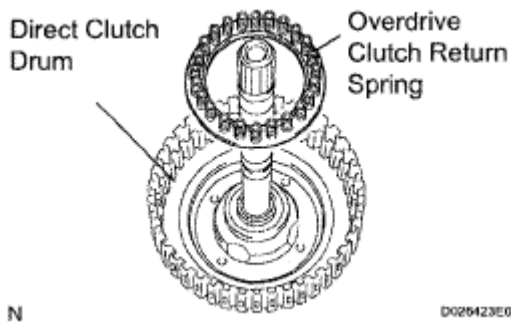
Identifying Overdrive Clutch Return Spring And Direct Clutch Drum
